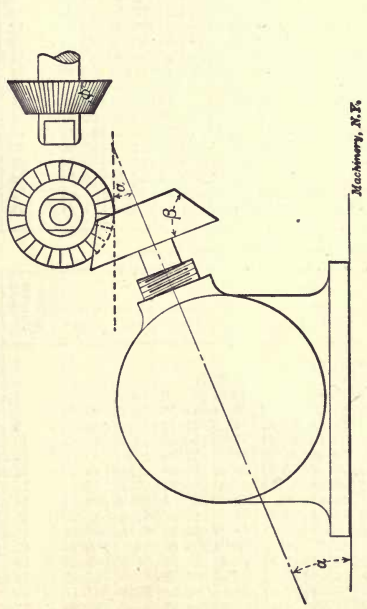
Diagram of Head, Blank, and Cutter for Milling Teeth. *Machinery, N.Y.
